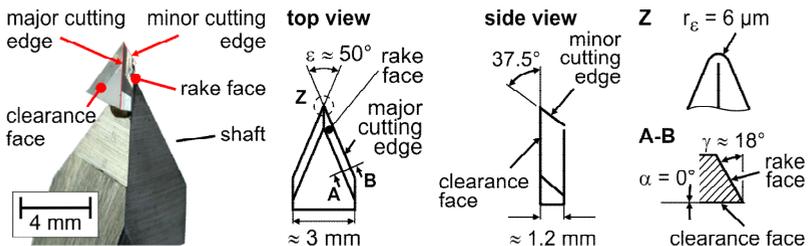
Standard tool geometry for Diamond Micro Chiseling
